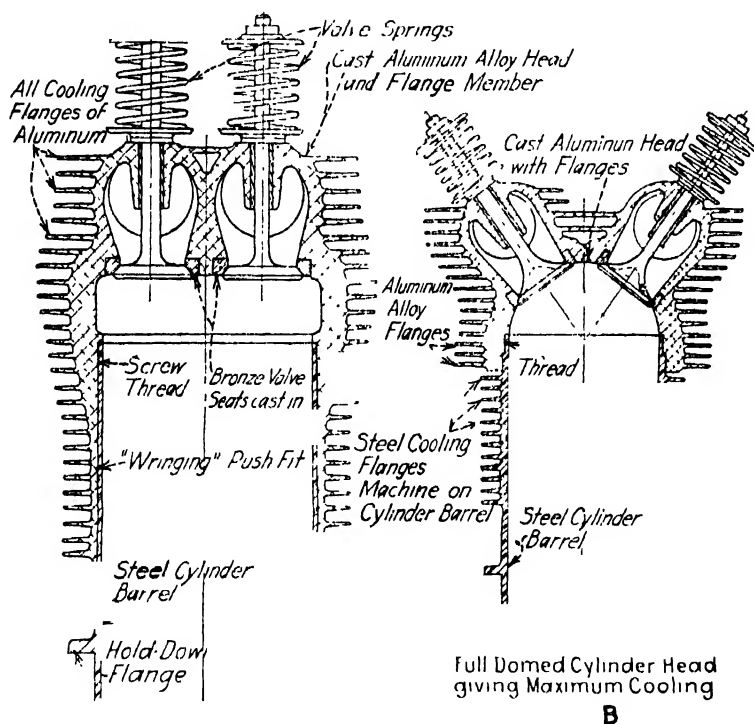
Air-Cooled Cylinders for Aviation Engines. A—Steel Barrel Screwed into Cylinder Head of Aluminum Alloy with Integrally Cast Cooling Flanges Extending Down the Cylinder, which is a Force Fit in Surrounding Aluminum Piece. B—Steel Cylinder Barrel with Circumferential Flanges Machined Integral with Short Aluminum Alloy Head Screwed to it. Form B Gives Best Cooling.
